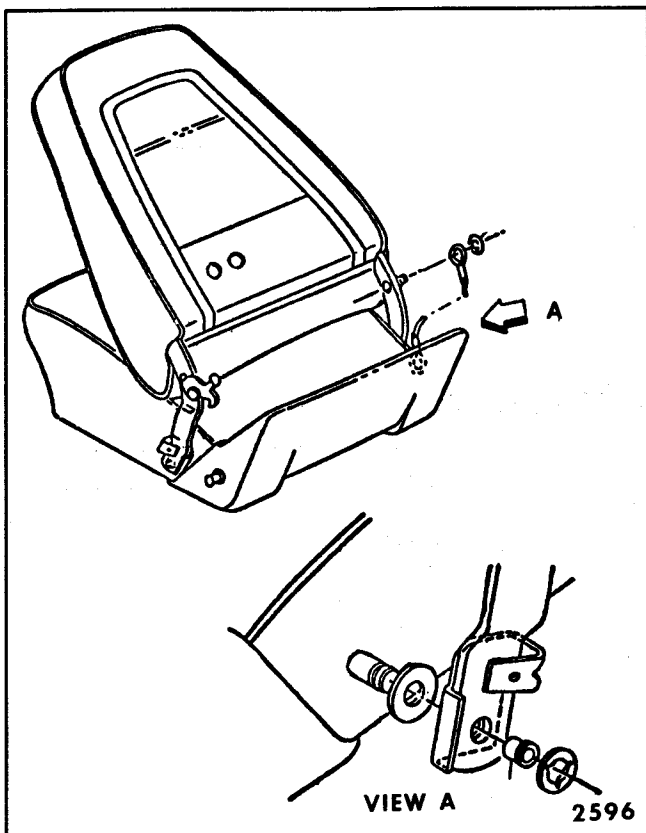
Front Seat Inner Hinge Pin Assembly Installation
